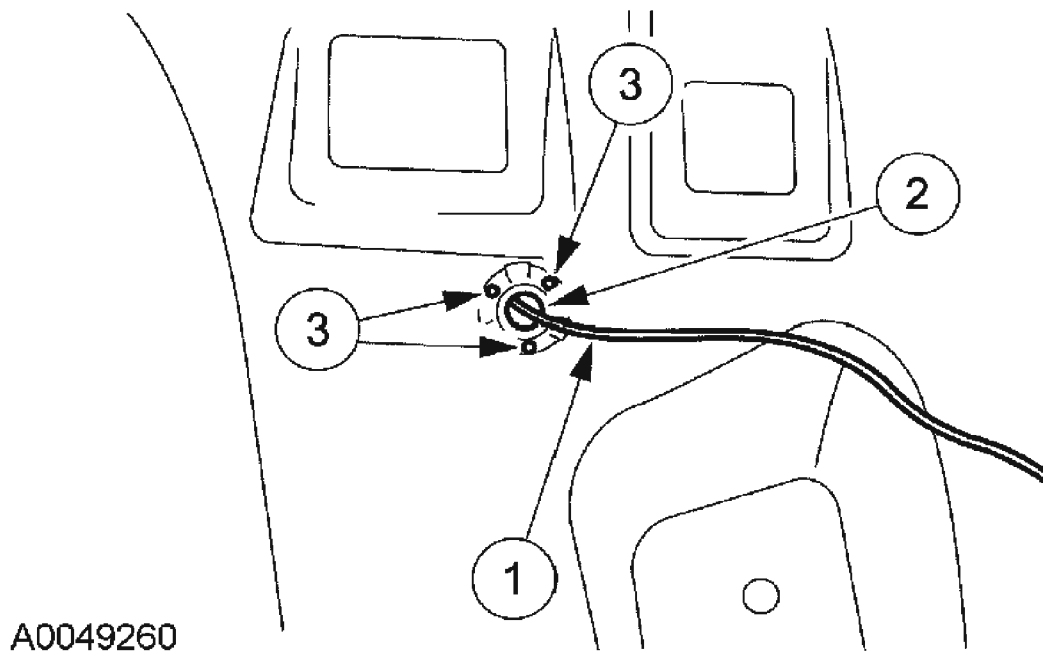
Pulling Welding Wire Back Through Clearance Hole
